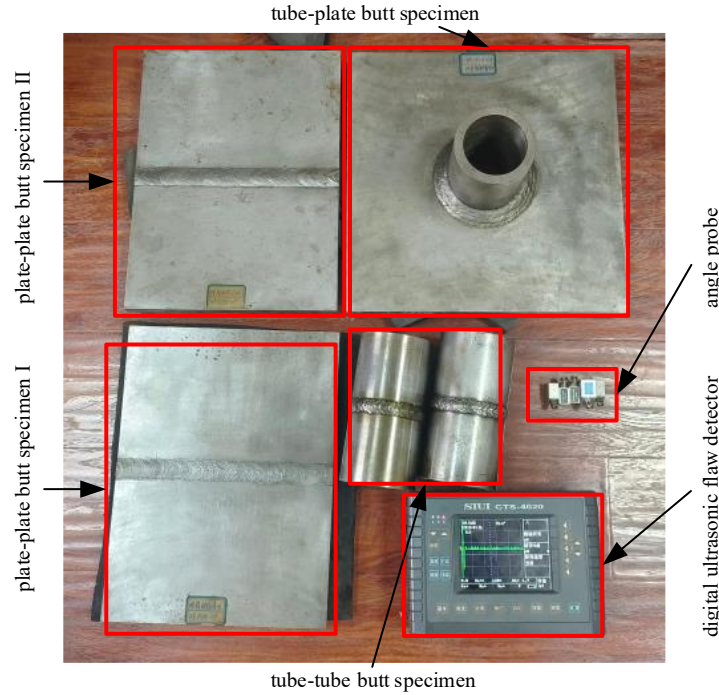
Welding specimens and ultrasonic signal acquisition.
